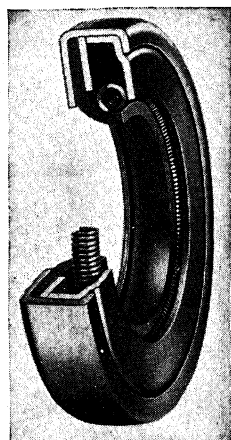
Oil and grease seal. (Courtesy National Motor Bearing Company.)
